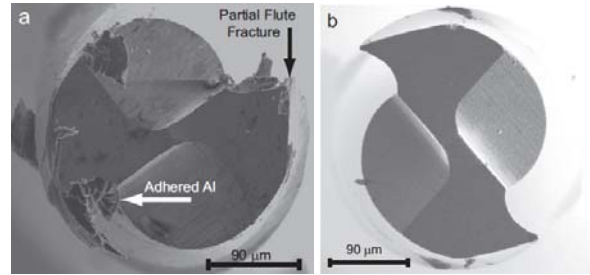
SEM images representative of tool condition after machining: (a) uncoated tool showing adhesion of Al and partial tool fracture and (b) diamond-coated tool showing no observable adhesion of Al or tool wear.
